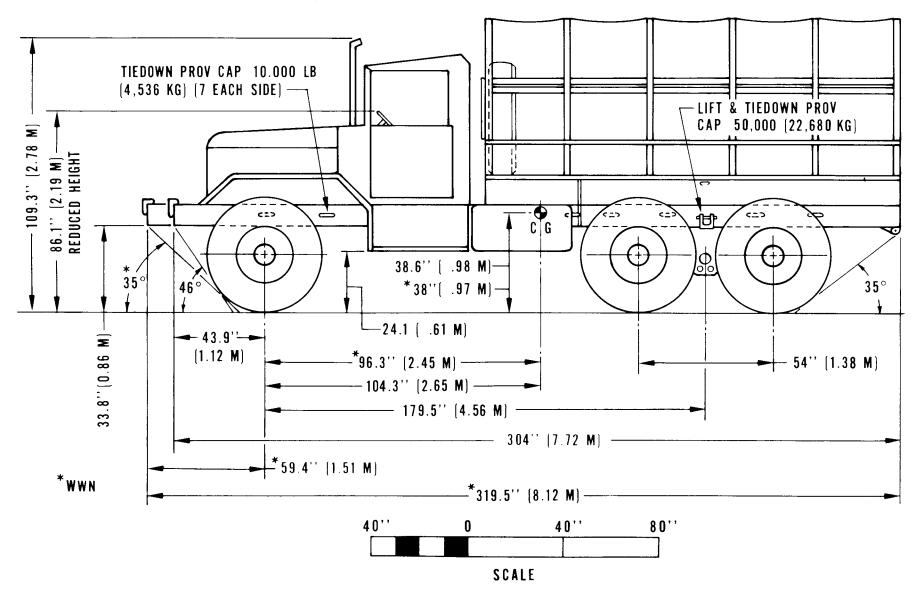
Side elevation of truck, cargo, WWN and WOWN, M813.
